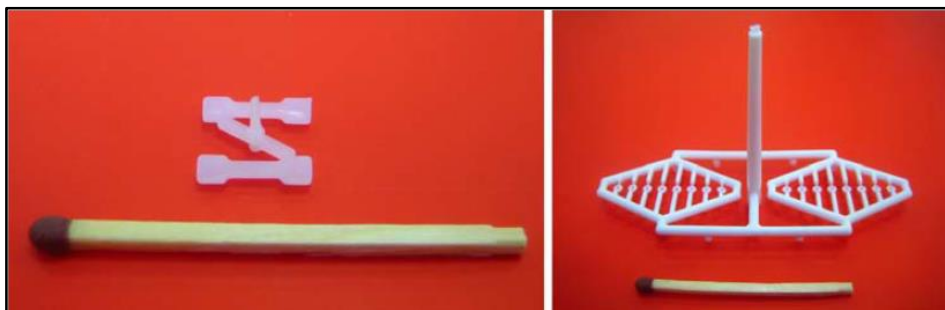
Comparison of feeding channels to mold micro-part with conventional molding machine (right) and with microinjection molding machine (left). [18]
